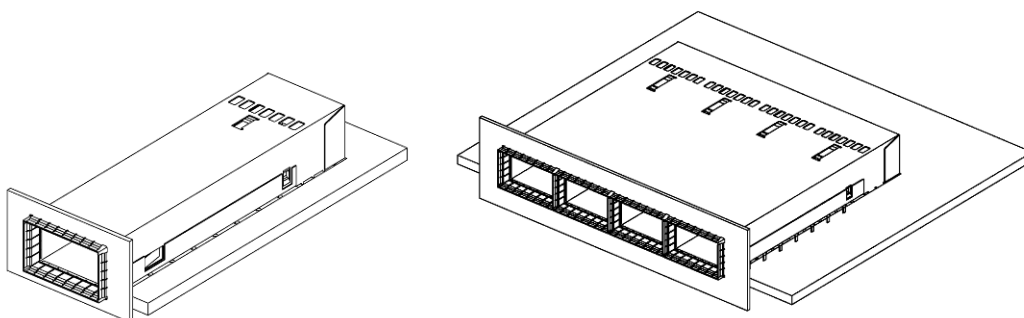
1x1 and 1x4 Cage, host PCB and panel
